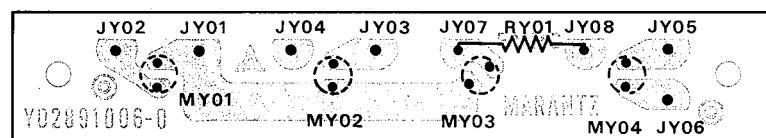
Indicator Lamps Assembly PY01 Component Locations
